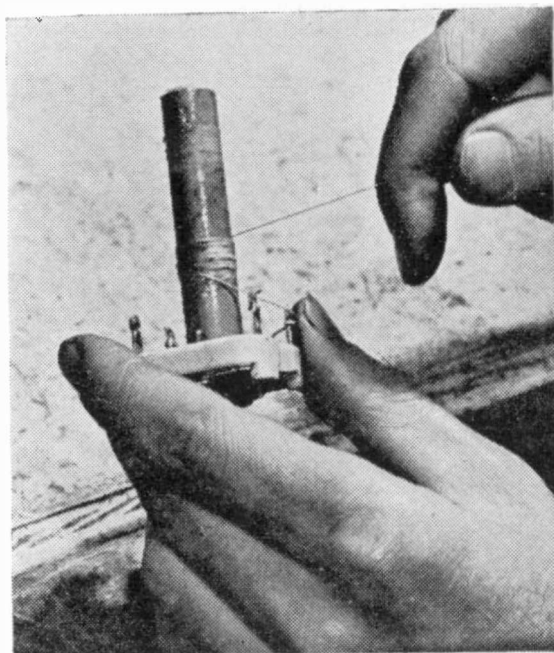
Photograph shows method of winding i.f.'s on old coil forms. For complete coil specifications see Table 1.
